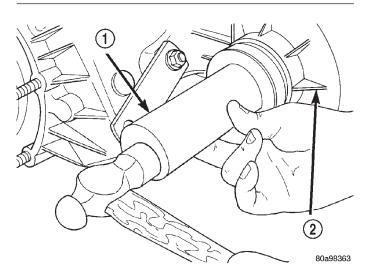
Front Output Seal Installation 1 - INSTALLER 6952-A
